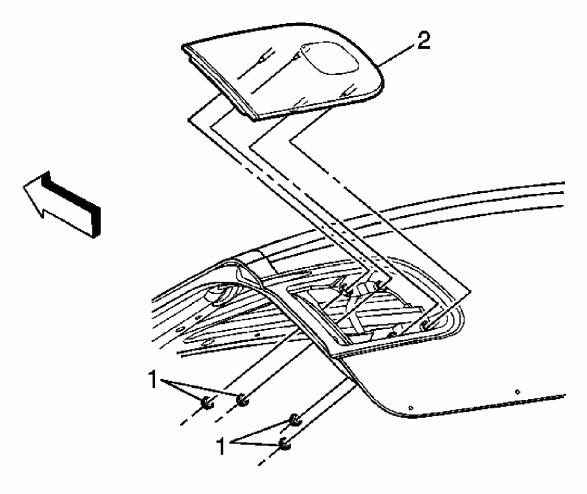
Identifying Rear Auxiliary Turn Signal Lamp Courtesy of GENERAL MOTORS CORP.
